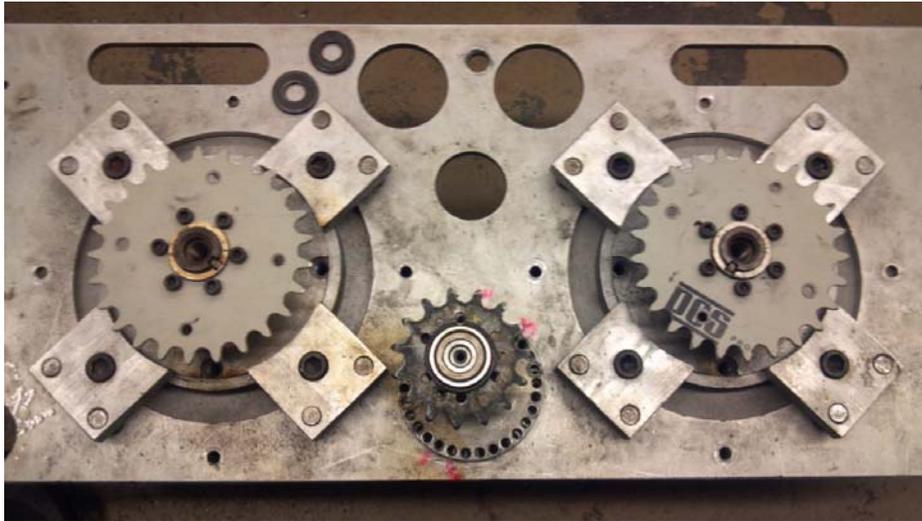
Motor drive plate, sprockets, and chain tensioner
